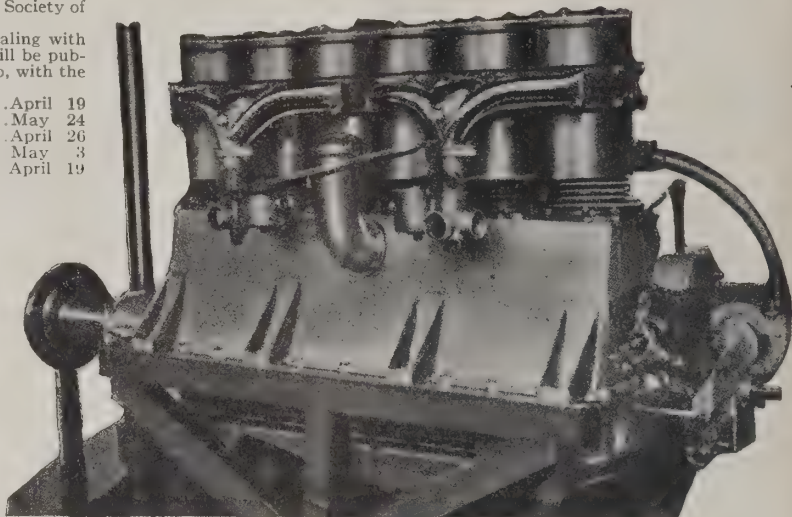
120 H. P. Sleeve-Valve Argyll Engine. Notice the method of attaching the intake and exhaust manifolds. They are formed in two halves, and held together so as to encircle the cylinders
